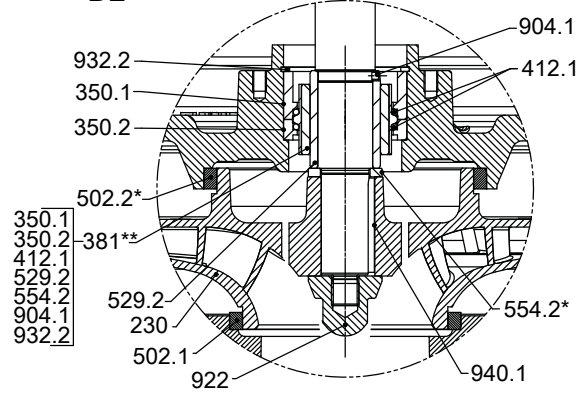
Detail drawings of hydraulic system (depending on bearing size)
